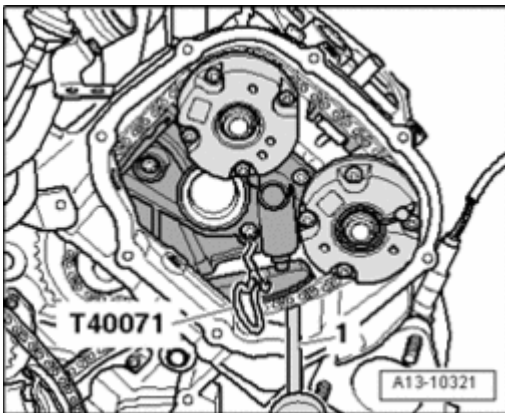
Pressing Right Camshaft Timing Chain Tensioner Glide Track Inward With Screwdriver As Far As Stop And Securing Chain Tensioner With Locking Pin T40071
